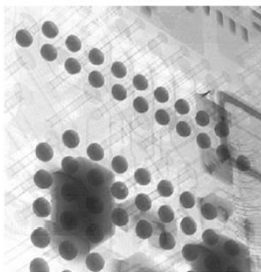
X-ray image of the affected solder joints – no visible defects can be detected
